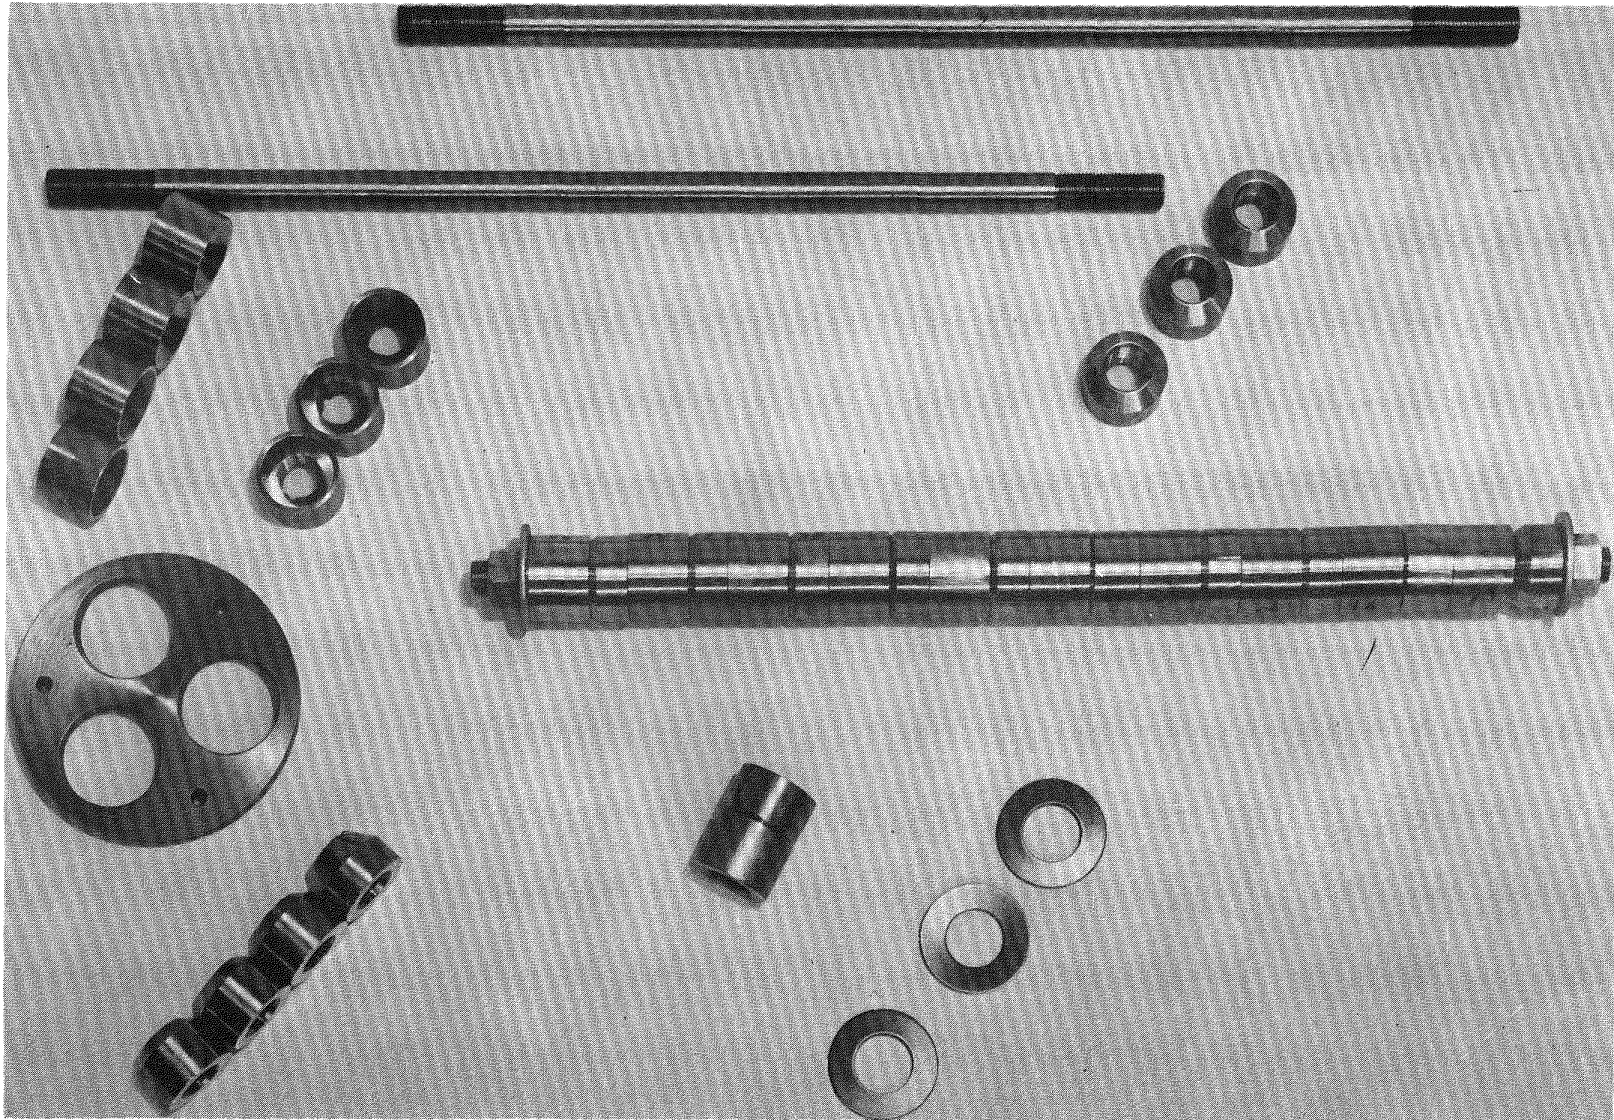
Small-scale test parts for adhesion testing of fuel-element-to-grid-plate conical seal
